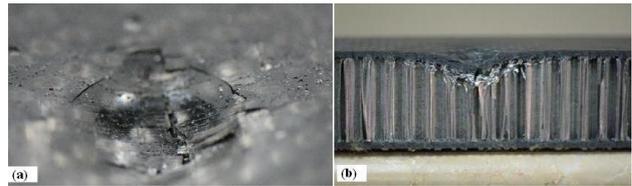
Photo of indentation damage in sandwich panel after quasi-static indentation test showing (a) fiber breakage and cracking in face sheet and (b) core crushing and local buckling in cross sectional view
